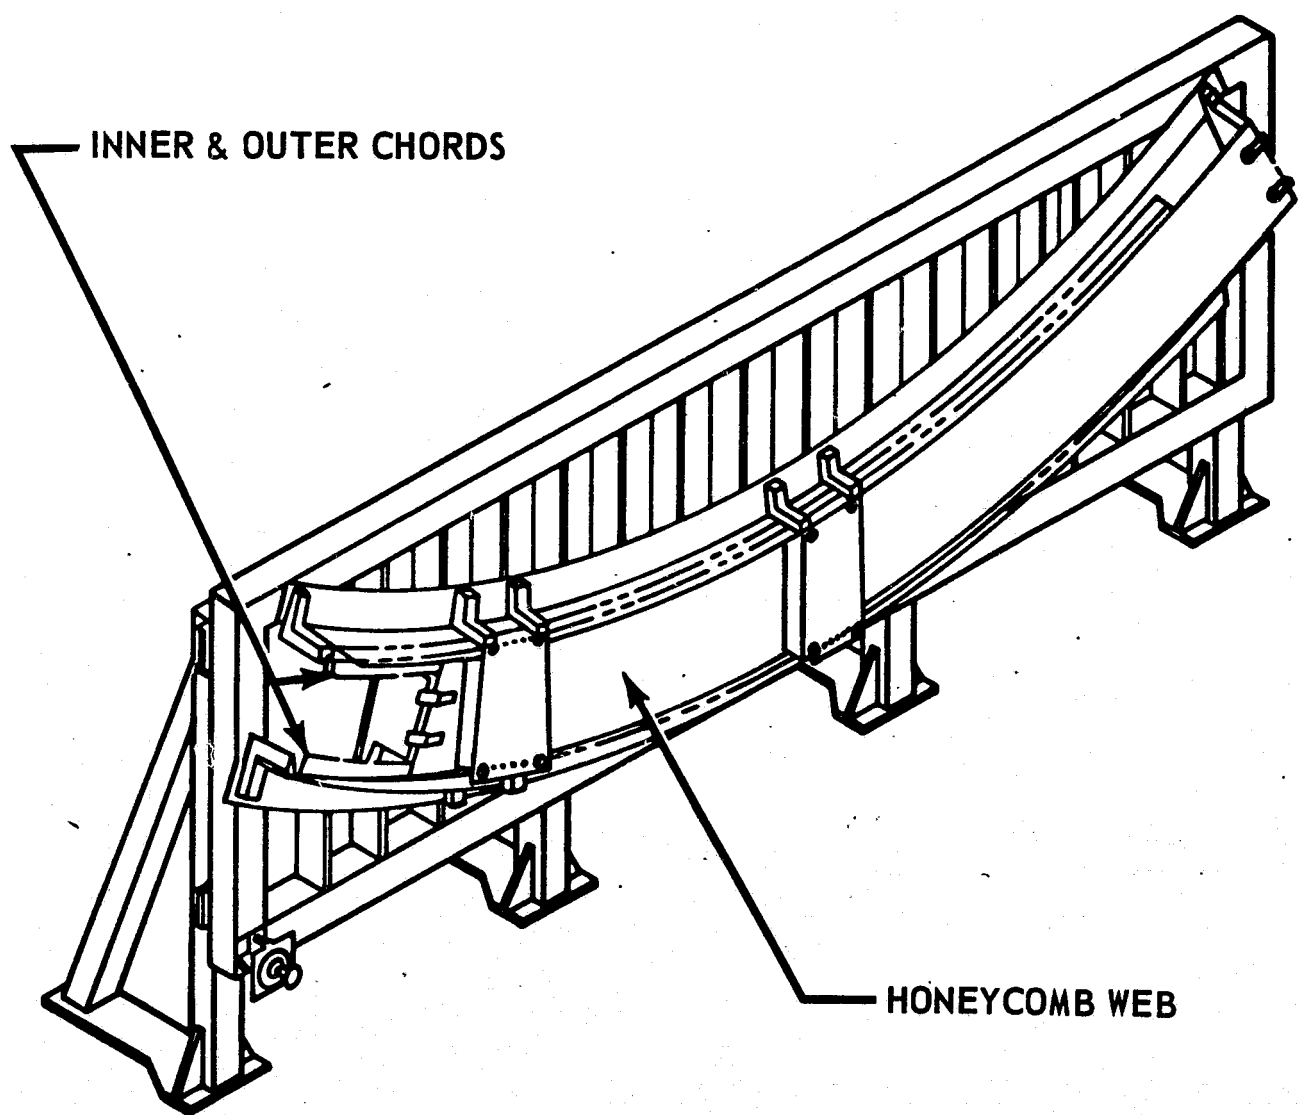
INJECTION STAGE RING SEGMENT ASSEMBLY FIXTURE
